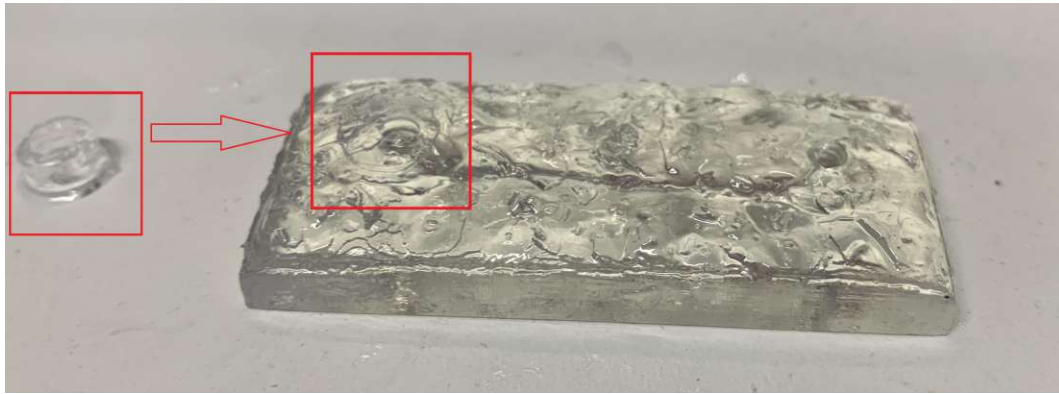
An unusable channel after the supporting structures are removed. The red rectangular marks the Luer connector, which should be on the top of the channel.
